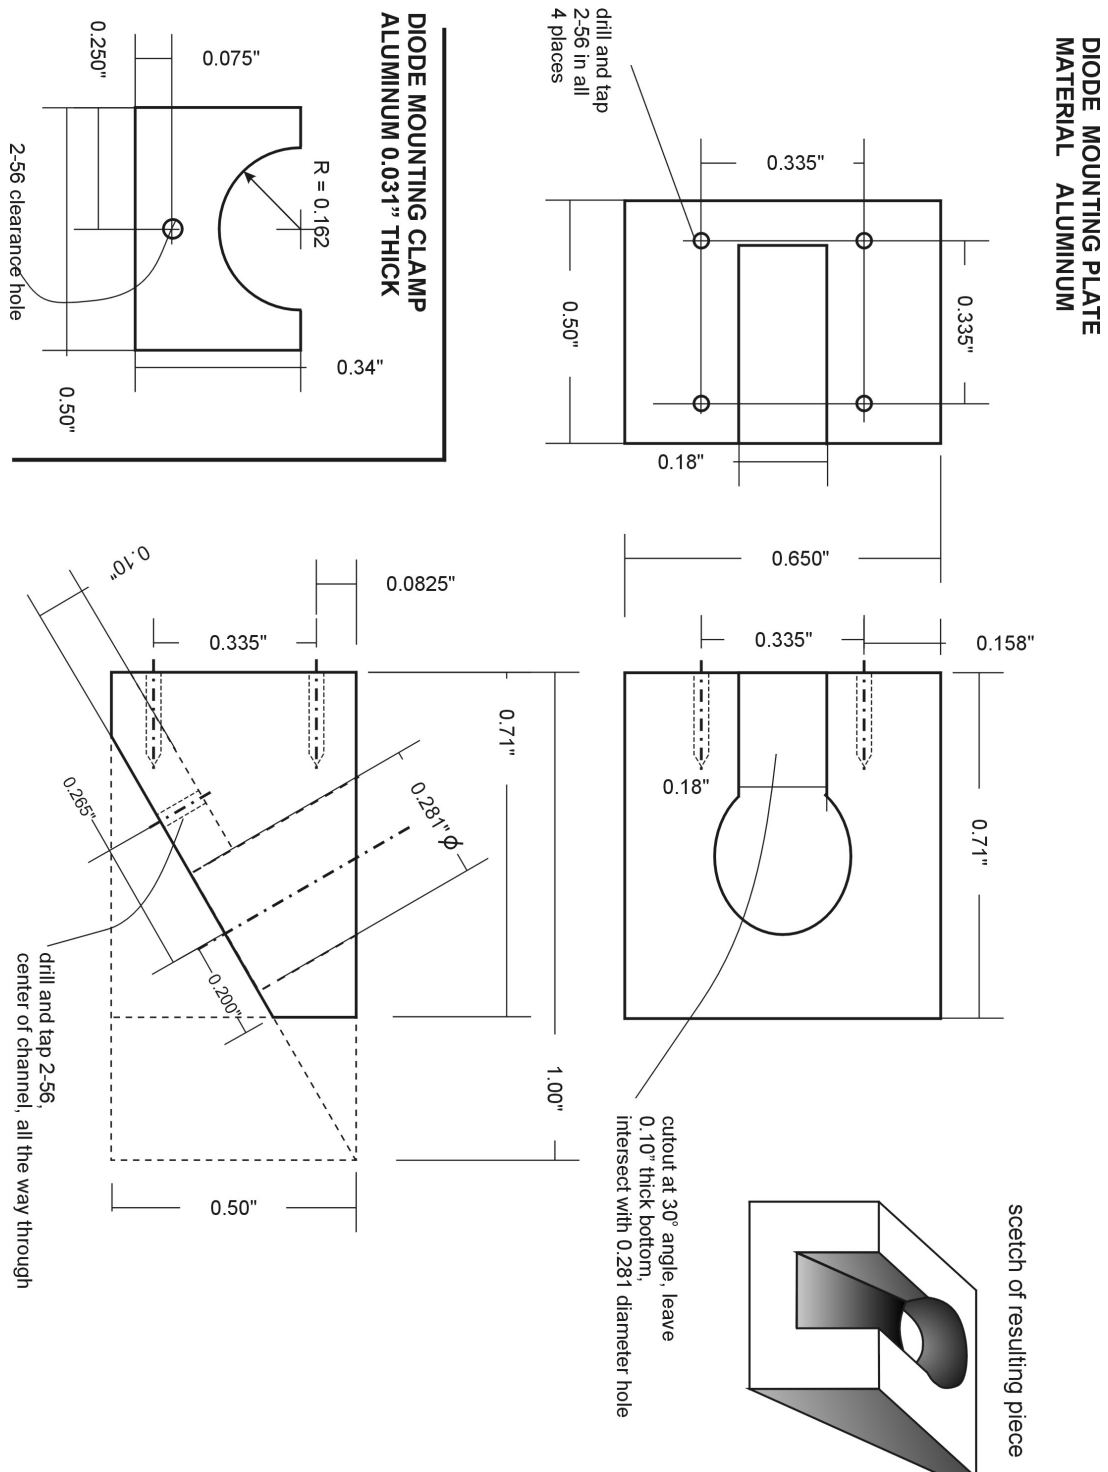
Photo-detector mounting plate, number (J) in Figure B.4. The photo-detector is clamped into the hole, wire are run through the groove.
